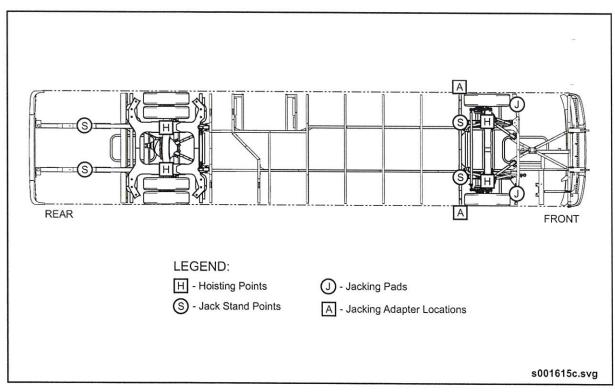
Jacking (hoisting) Points & Stand Placement
